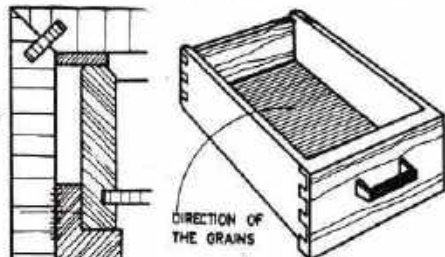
A DRAWER BOTTOM ALWAYS RUNS ACROSS THE DRAWER AS SHOWN
